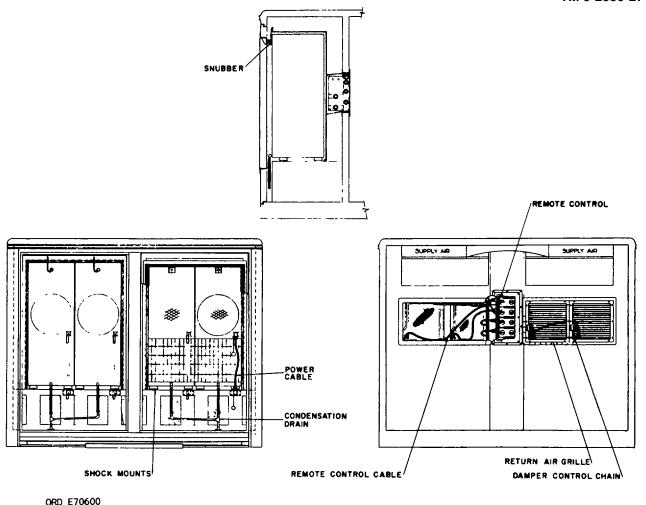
Air conditioner and remote control unit, XM680, XM680E1
